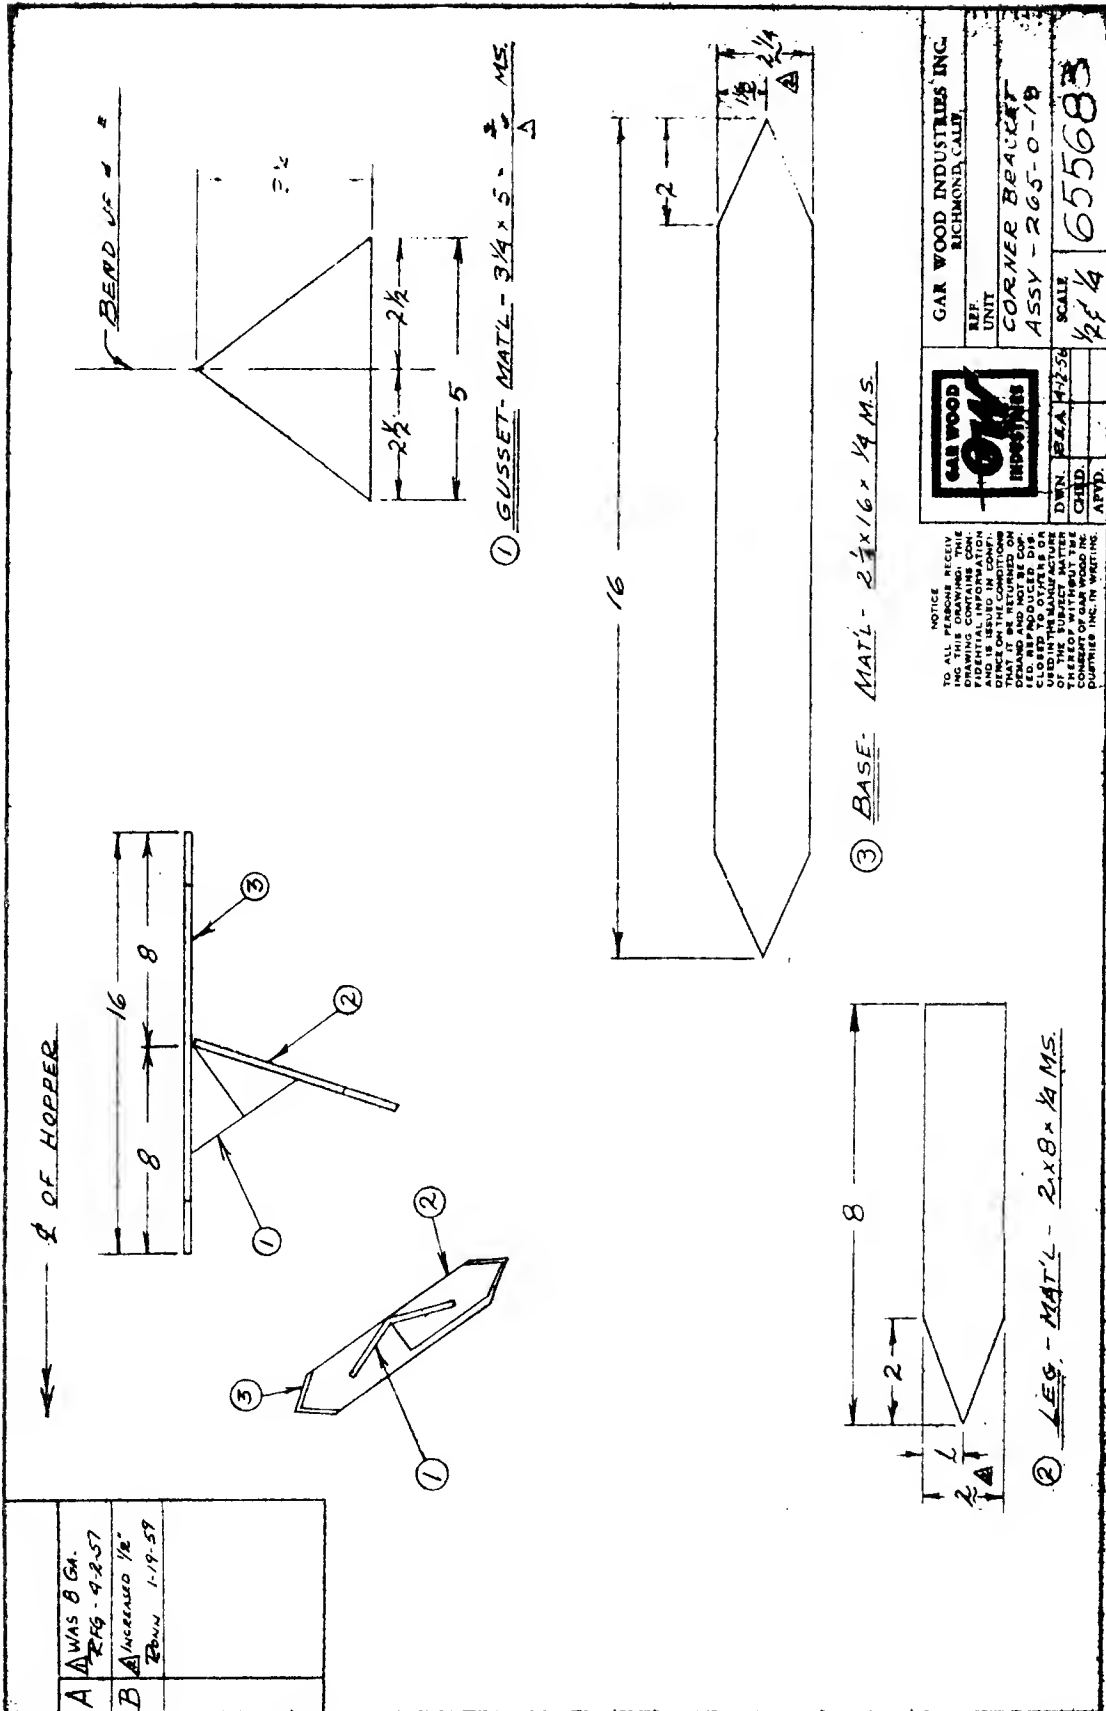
Humped Gusset for Corner Between Compression Member and Crosswise Channel on Hopper Wall.
